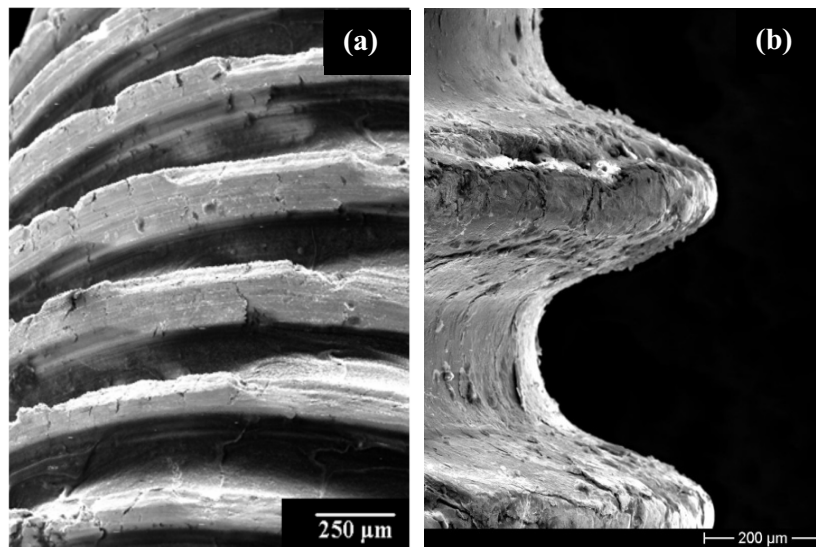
SEM micrograph showing the screw manufactured by means of thread turning (a) and thread rolling (b).
